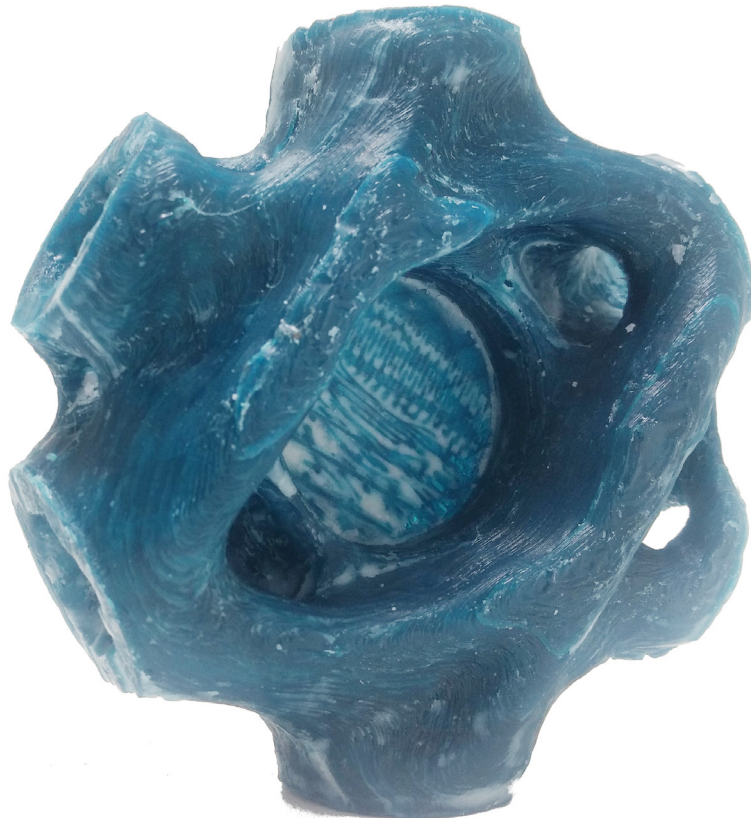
Final result of the printing in layers. Candle wax has been used to fill any seams and holes.
